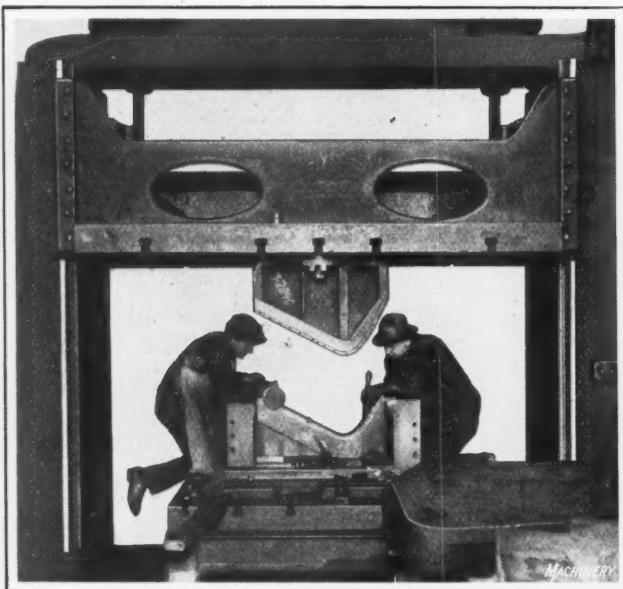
Matching the Male and Female Die Members of a Set in an Imprinting Machine
